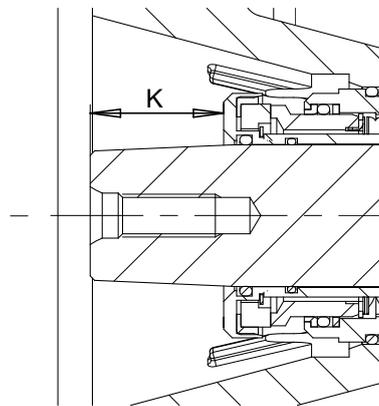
Reference dimension "K" from shaft end to mechanical seal
